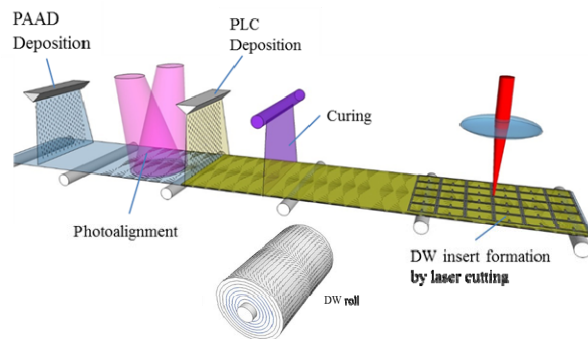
A schematic of roll-to-roll 4G Optics manufacturing process.
